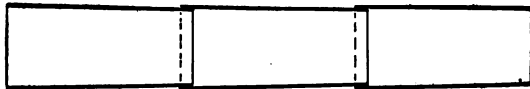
Illustrating the connection of joints which have a large and small end.
